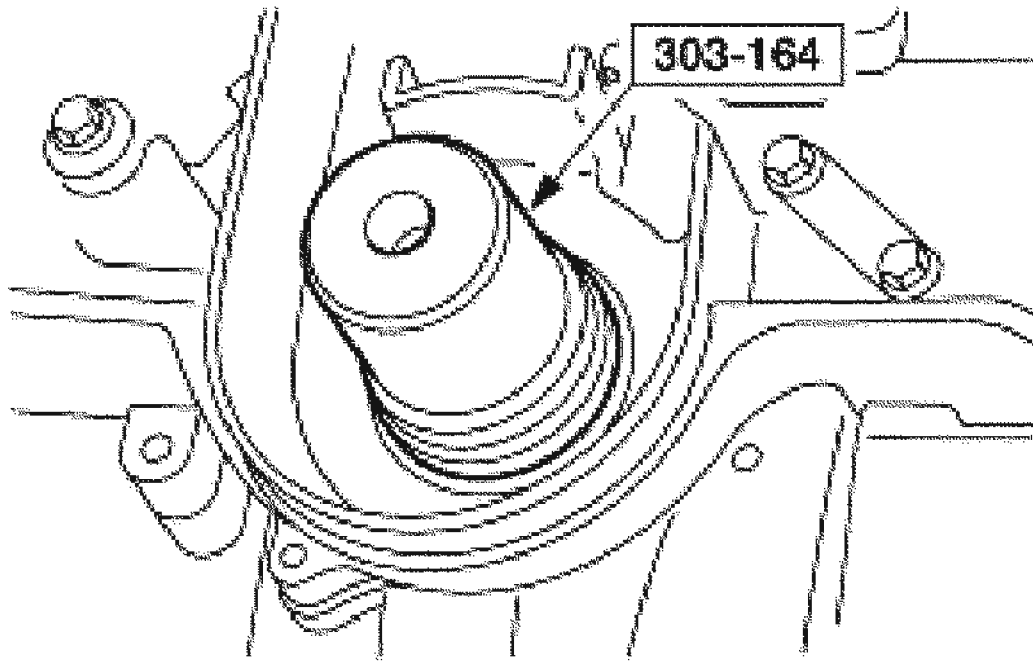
Removing Crankshaft Front Seal From Oil Pump
